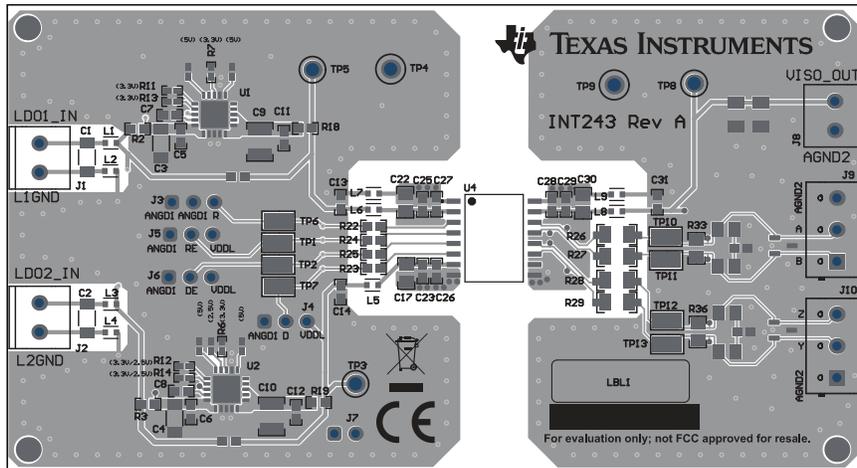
ISOW3080DWEEVM PCB Layout - Top
